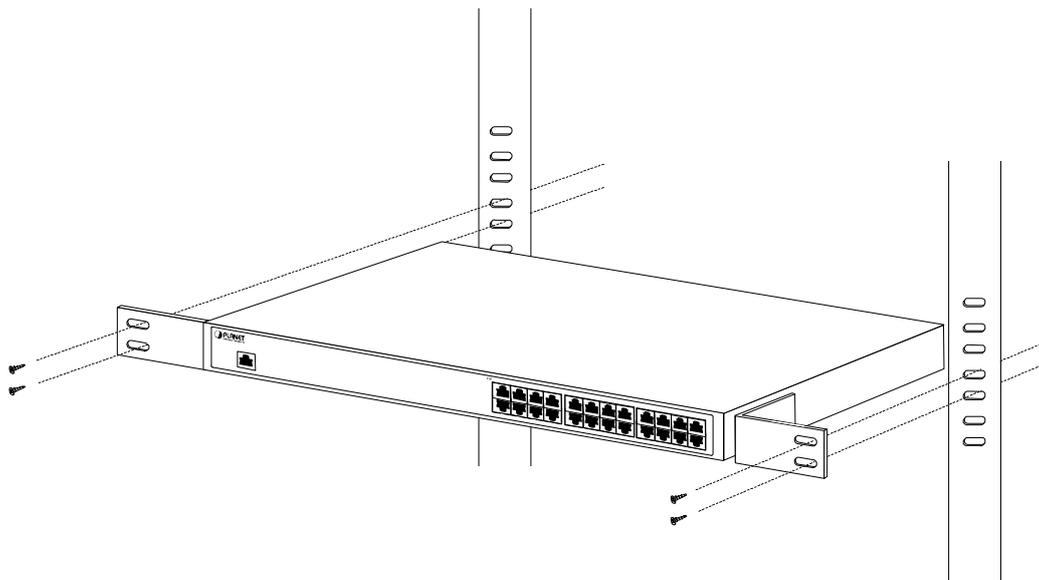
Mounting the PoE Injector Hub in a Rack
